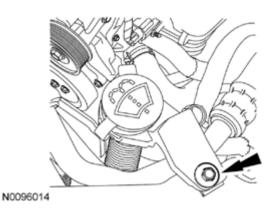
Locating A/C Tube/Windshield Washer Reservoir Bracket Bolt Courtesy of FORD MOTOR CO.
